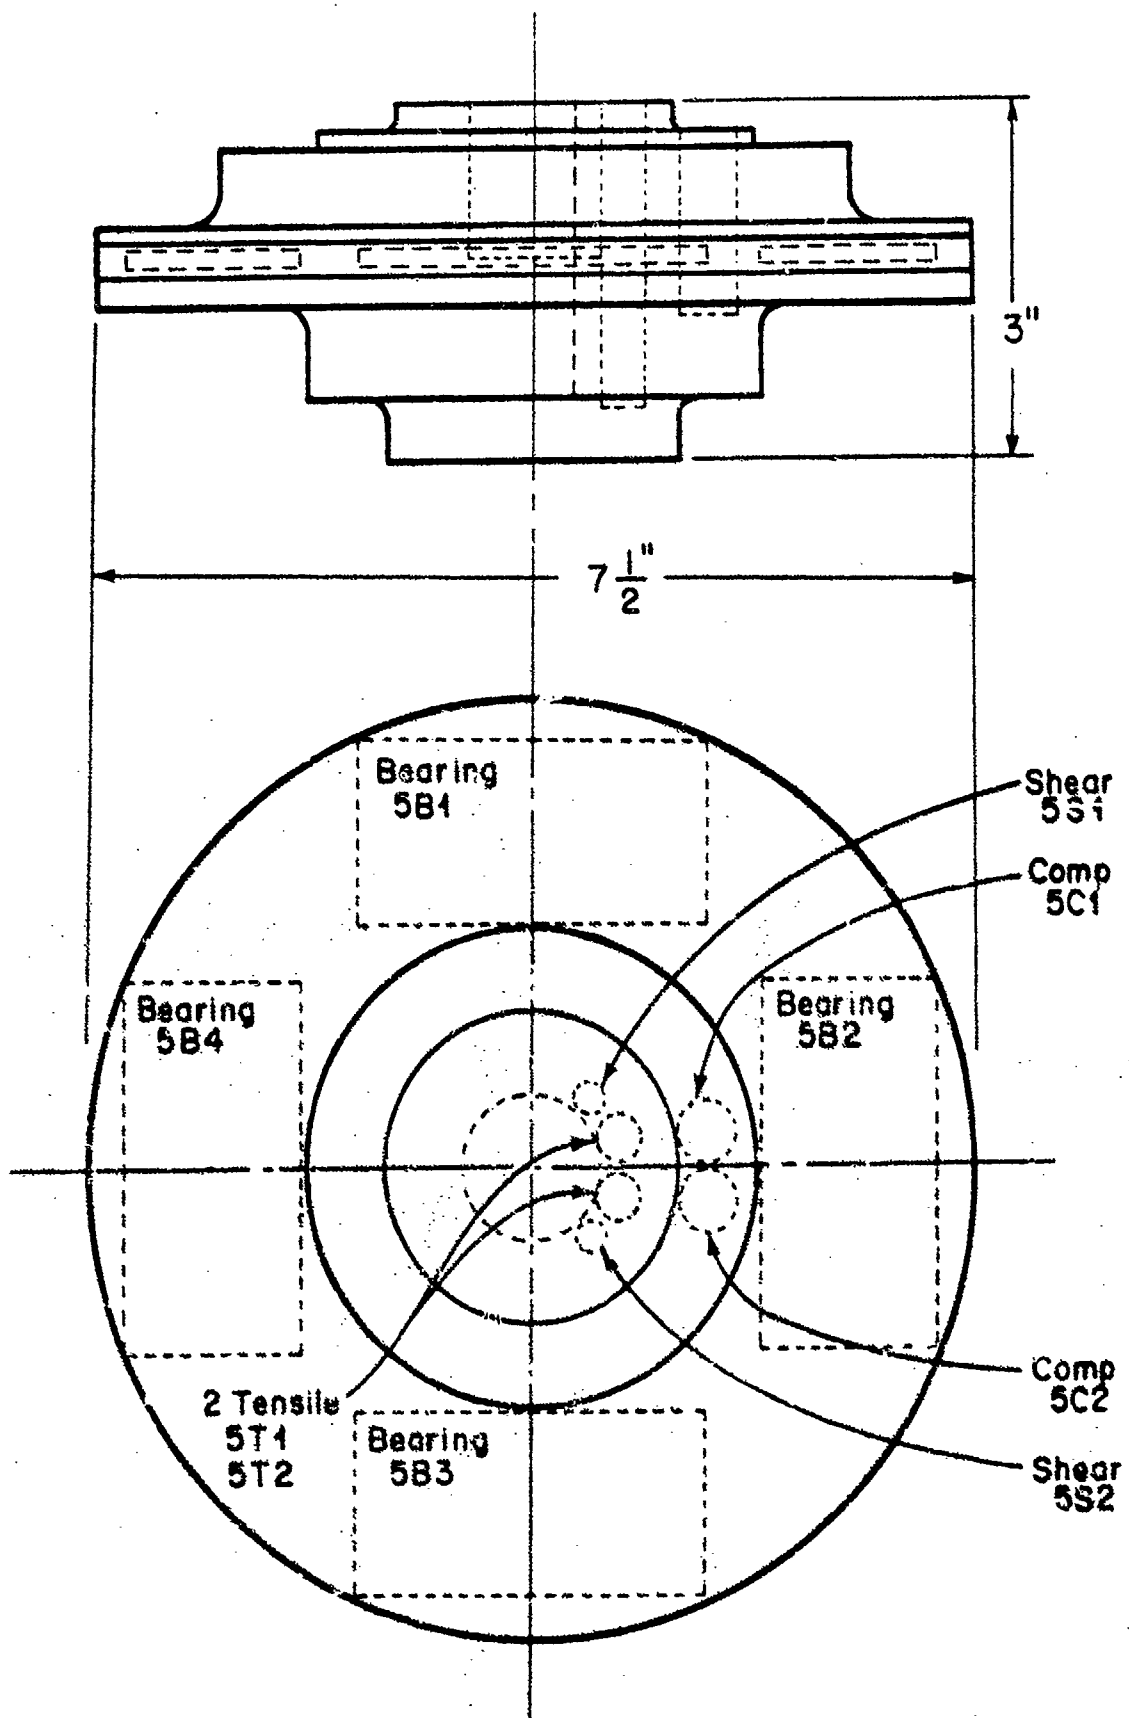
Location of test specimens for 15-5PH (H935) impeller #2 casting.
